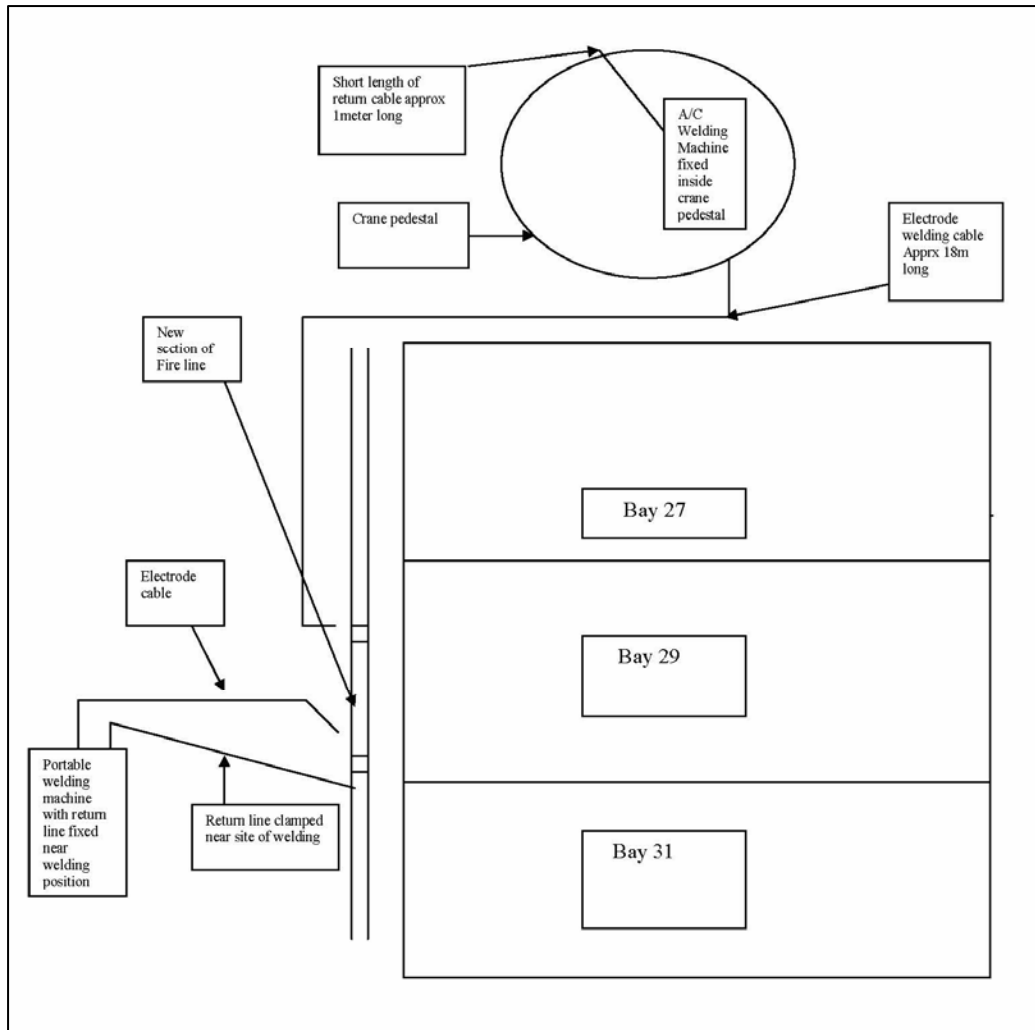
Welding cable arrangement for the fixed and portable welding machines
